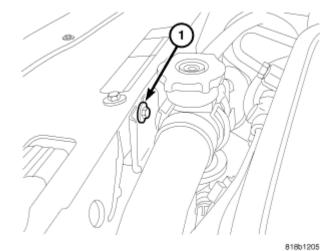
RADIATOR HOSE SUPPORT Courtesy of CHRYSLER LLC
